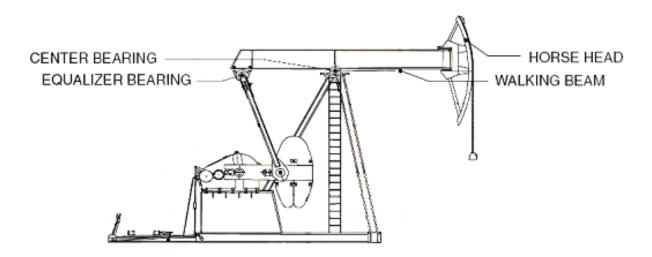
Conventional pumping unit with center and equalizer bearing [3]
